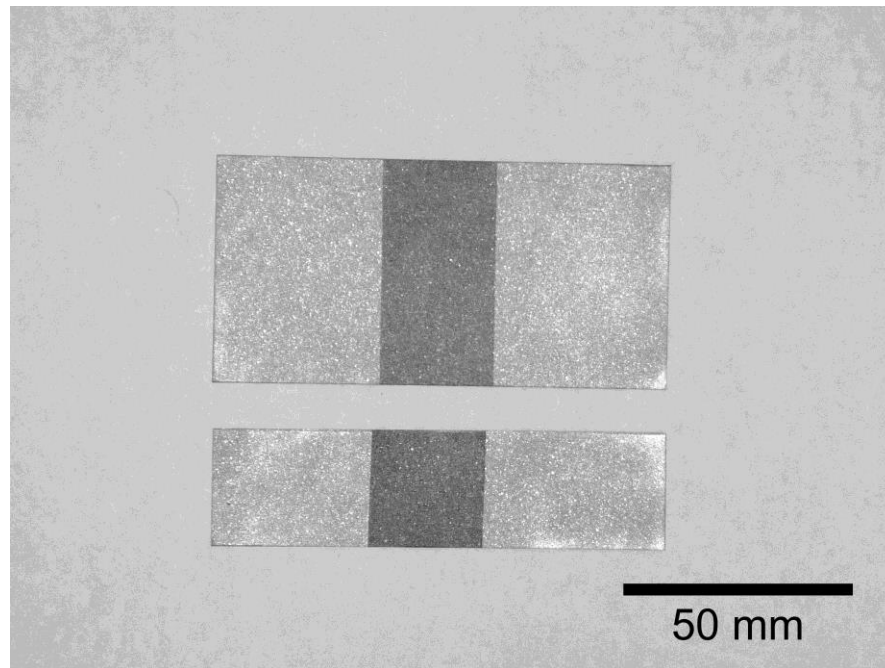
Example of simulated damaged IVD coatings on 4130 steel before coating after grit blasting (top: corrosion sample, bottom: strip rupture sample).
